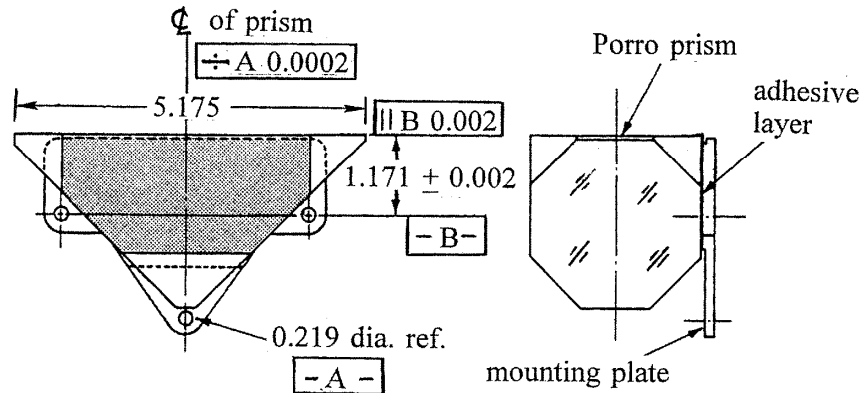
Mounting configuration for a Porro prism bonded on one side in cantilevered fashion. Dimensions are in inches. The bonding area is shown shaded.
